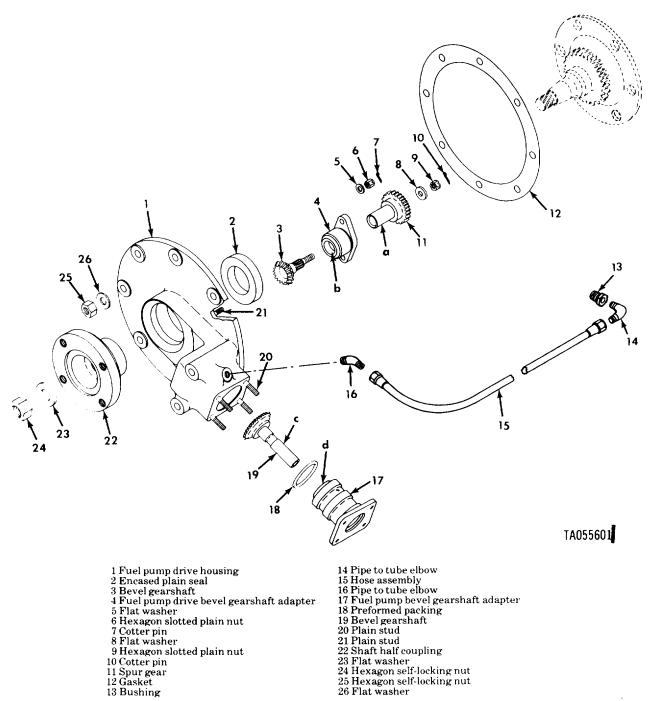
; Fuel pump drive housing and associated parts - exploded view, model AVDS-1790-2DR engine.
